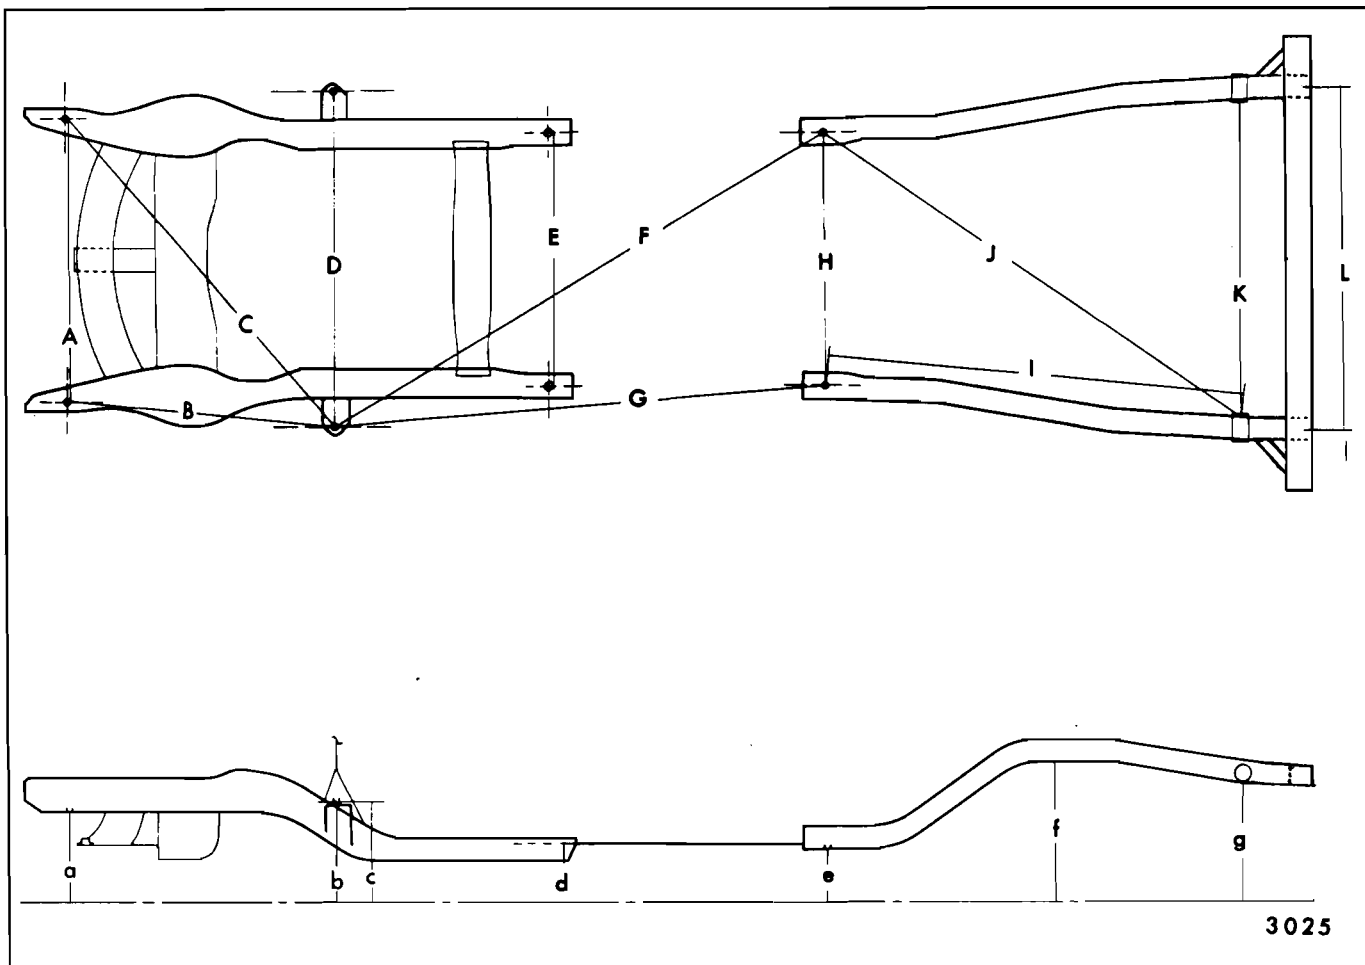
Horizontal & Vertical Checking Dimensions (Chevy Nova & Acadian "X" Bodies)
